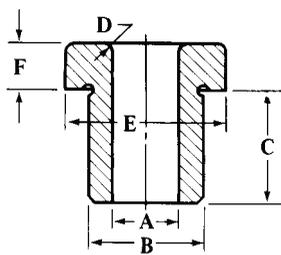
Head Type Press Fit Wearing Bushings — Type H
